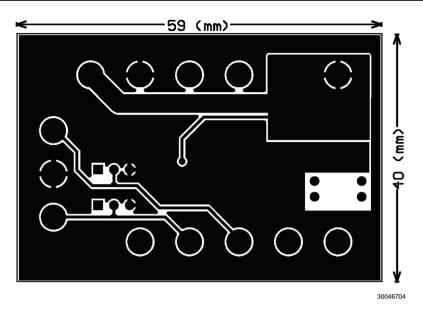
LM3407 Evaluation Board PCB Bottom View
